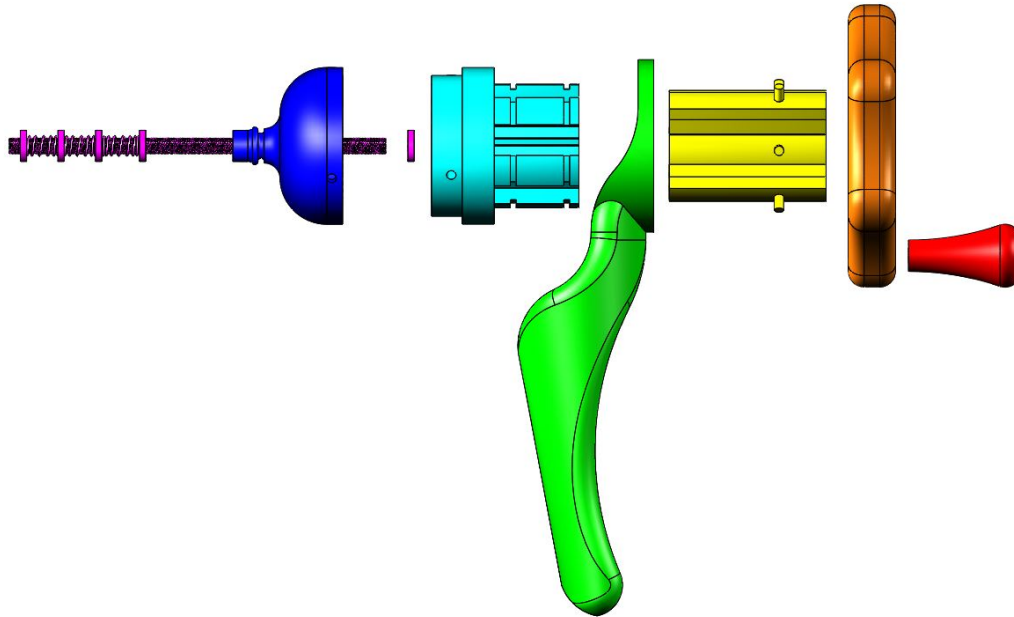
exploded view of the final prototype. The flexible shaft (pink) is connected to the tip (dark blue) by the heat shrink tube. In the tip an extra magnet (pink) is glued. The wire ropes are glued the sliders (yellow) that slide through the slider house (light blue). The final prototype is held with one hand by the hold (green) the other hand can be used to actuate the final prototype by either rotating the cam (orange) or rotating the sling (red).
